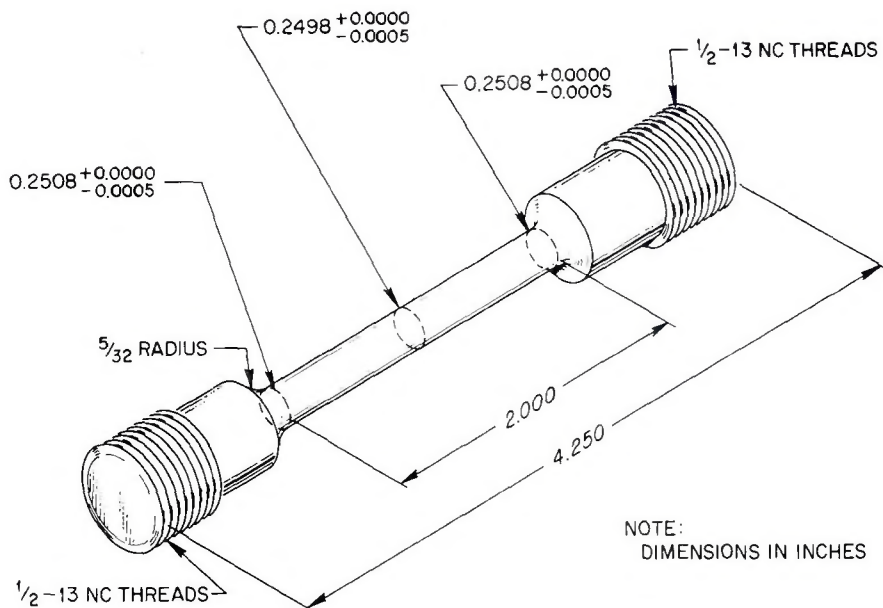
Threaded creep-rupture specimen for experimental stainless steel deposits
